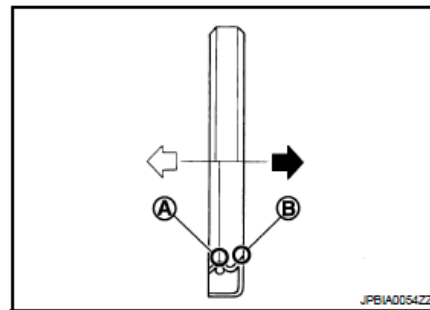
Identifying Oil Seal Lip And Dust Seal Lip
